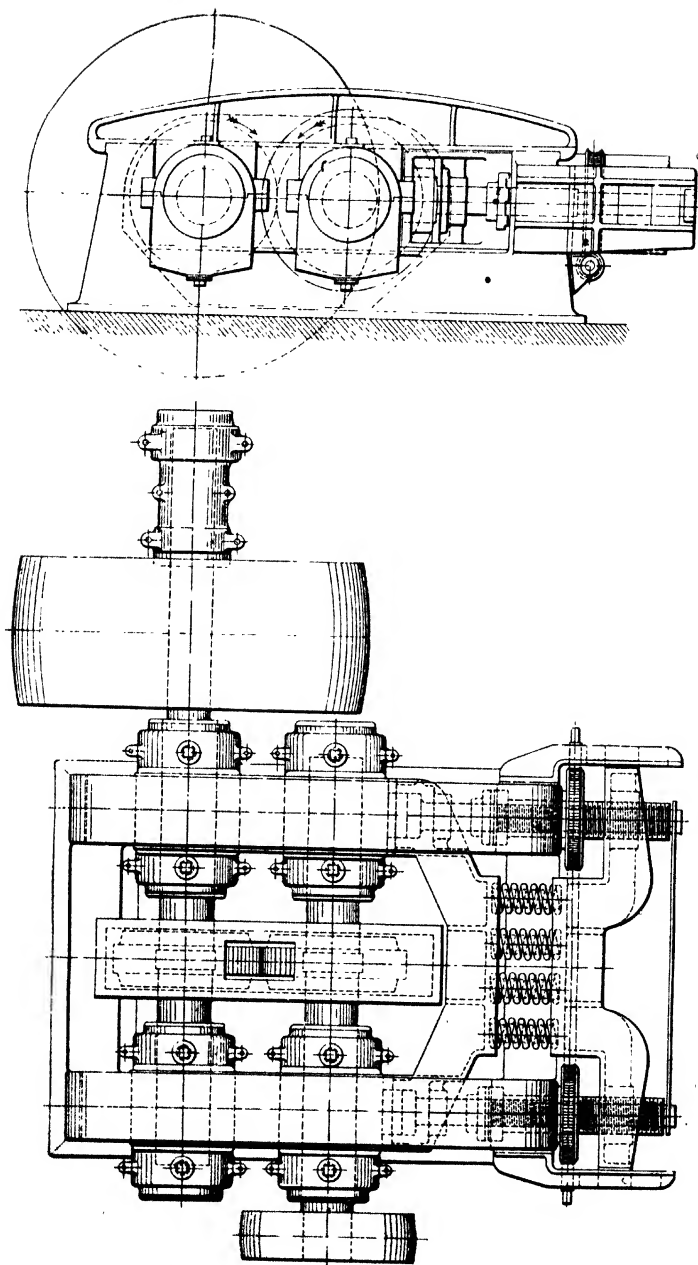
Modern Edison high-speed rolls. Elevation and plan.
